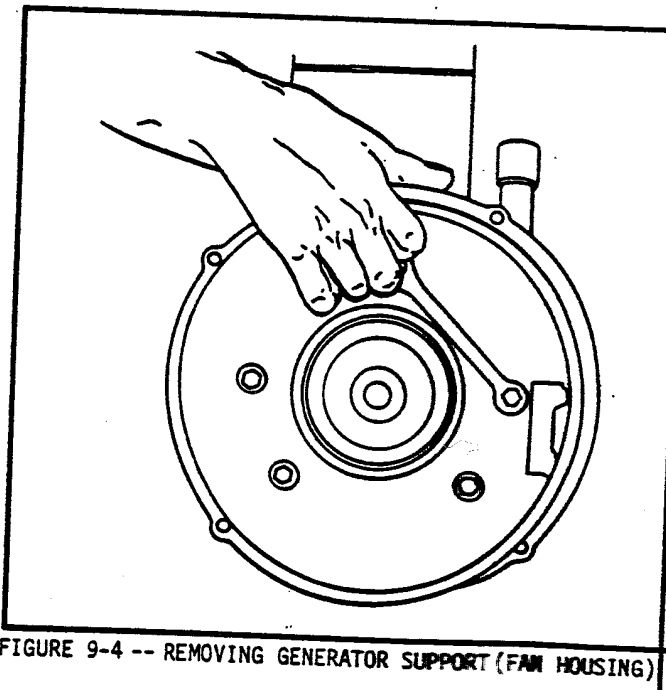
REMOVING GENERATOR SUPPORT (FAN HOUSING)
